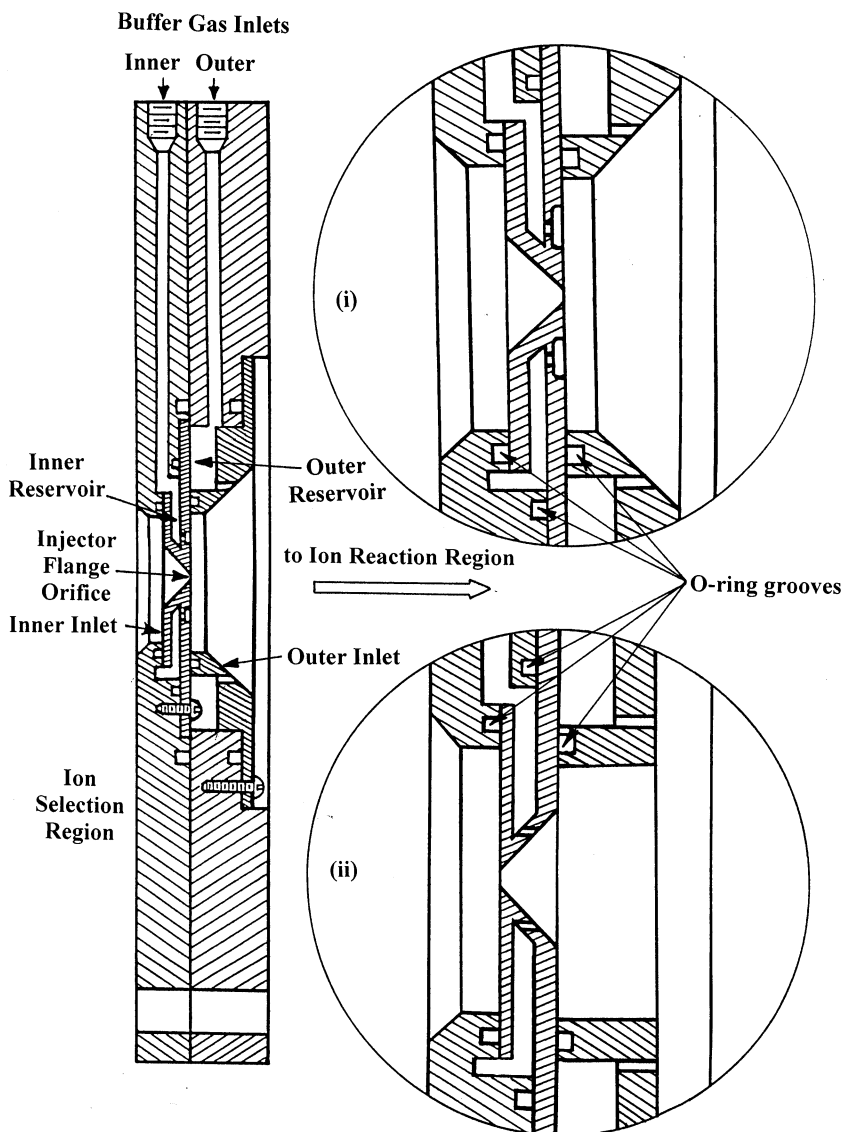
Overview of assembled injector flange and enlarged views of: (i) inner inlet-D/outer inlet-B; and (ii) inner inlet-B/outer inlet-A.
